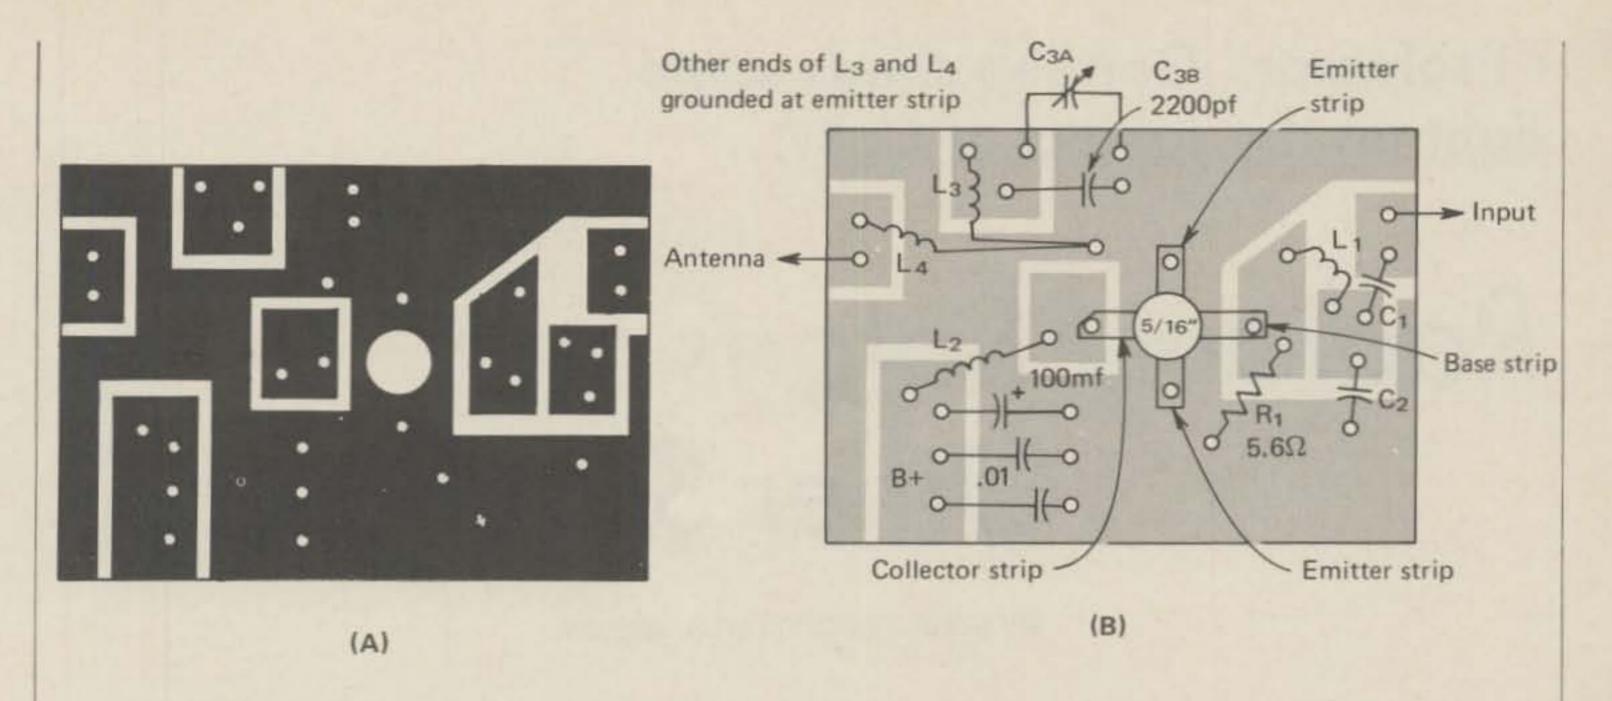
(A) Actual size printed circuit board layout for the 13 watt 160 meter amplifier, shown from the foil side.
